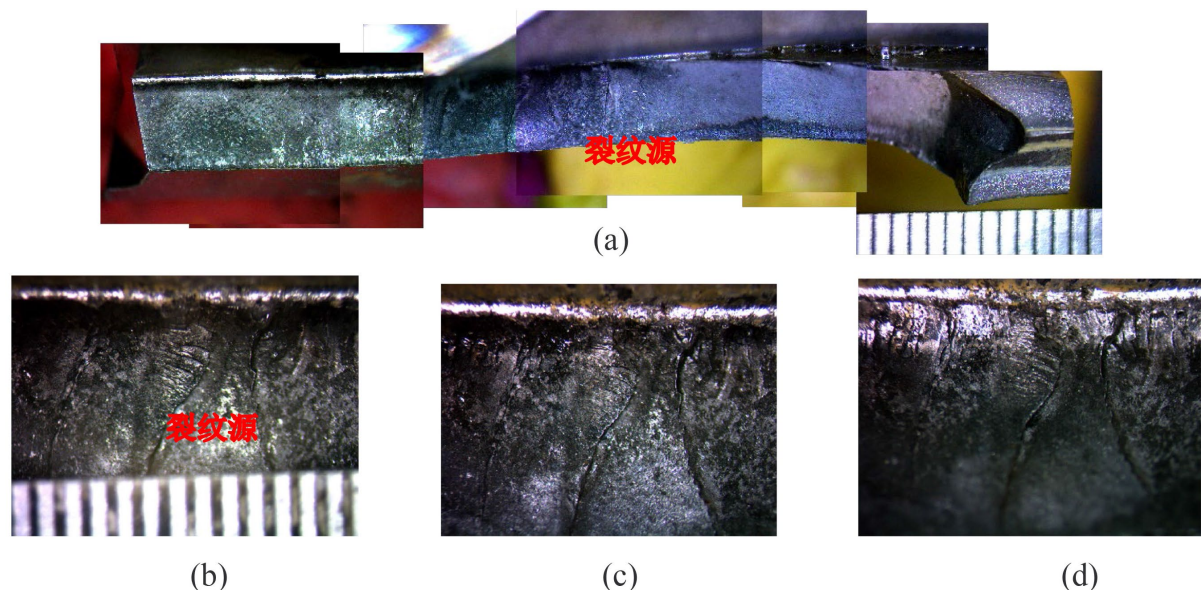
Fracture morphology of fatigue cracks of the tested steel. (a) Splicing morphology; (b) Flat magnification; (c) Tilt at 15°; (d) Tilt 45°
